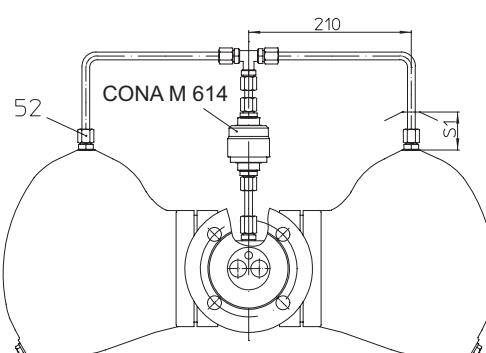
1 with flanges - horizontal installation and external vent kpl.
